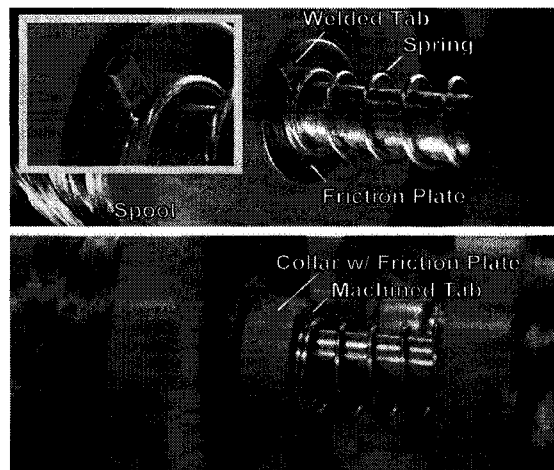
Spools, spring and friction plate (top), spring, collar with friction plate (bottom).
